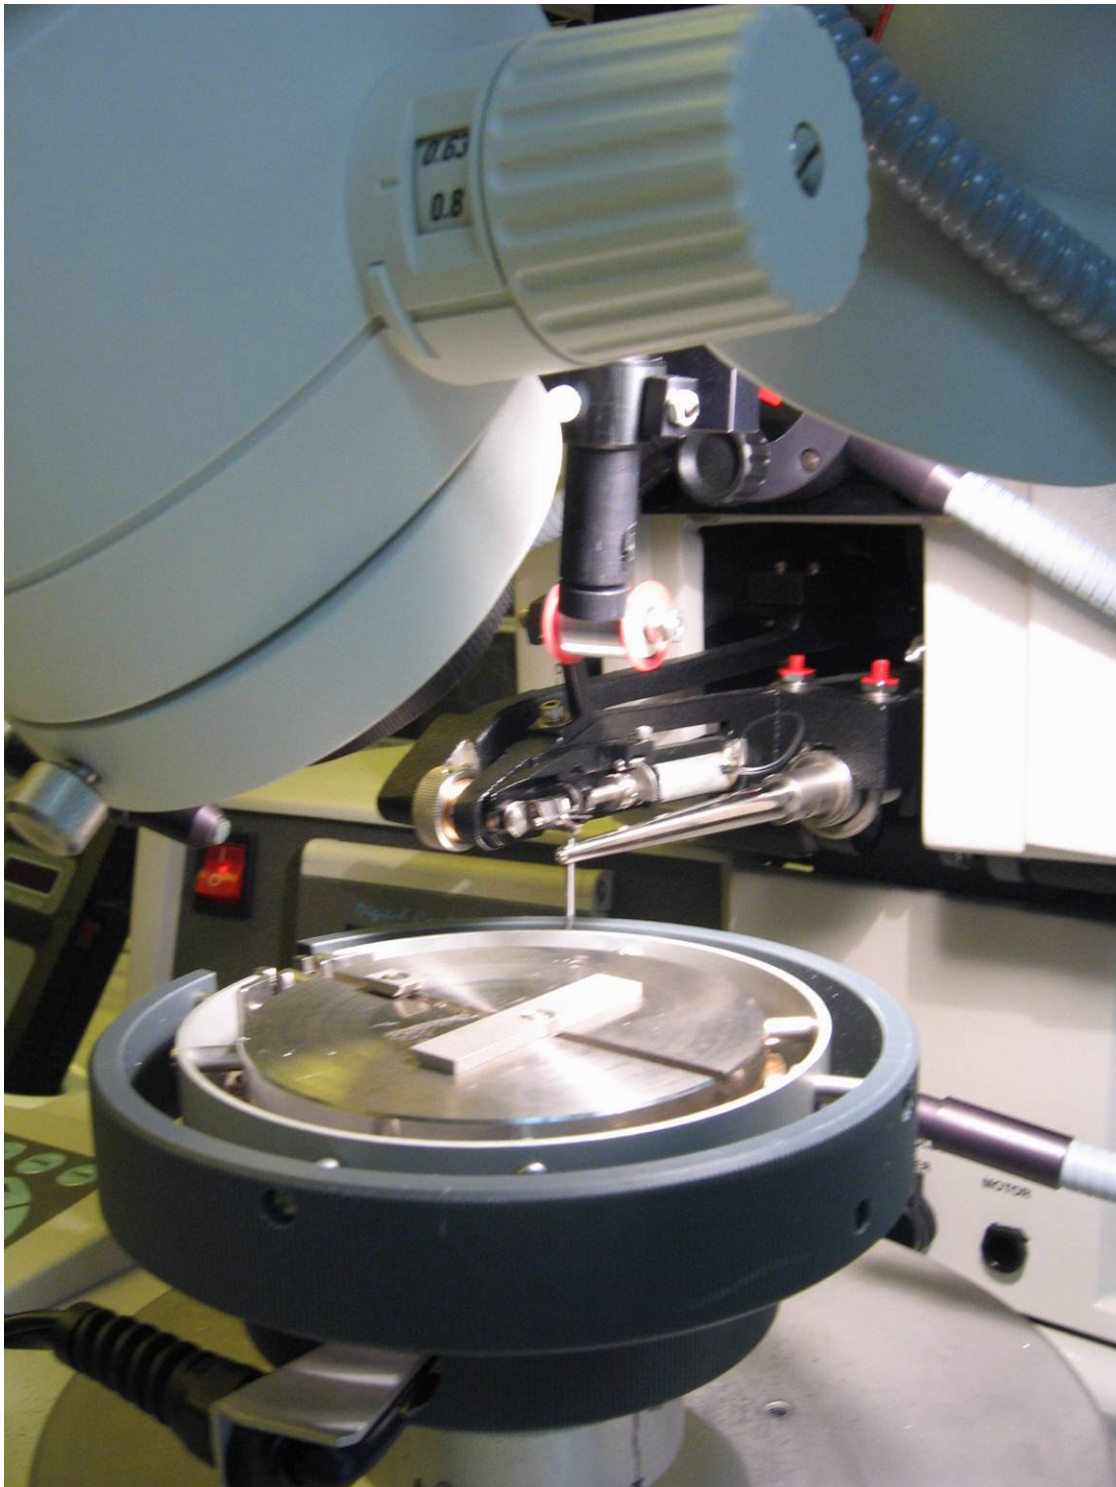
Picture of the Wedge, Spool and Sample Holder for the Wire Bonding Apparatus.
